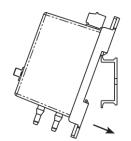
Catch the mounting hook on the edge of the DIN Rail, then rotate into place.
